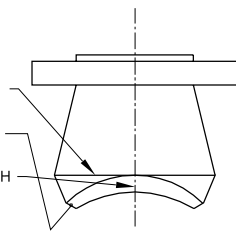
Flanged Butt Weld / Nipple Outlet
